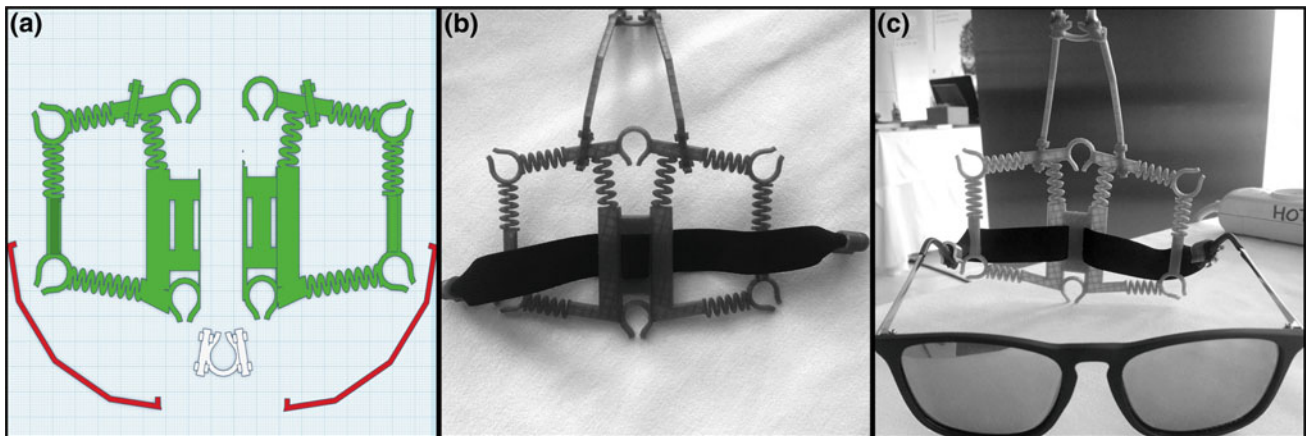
Final design and construction. a CAD model of flexible design and necessary components. b Assembled design and elastic strap. c Assembled design mounted onto an example pair of sunglasses
